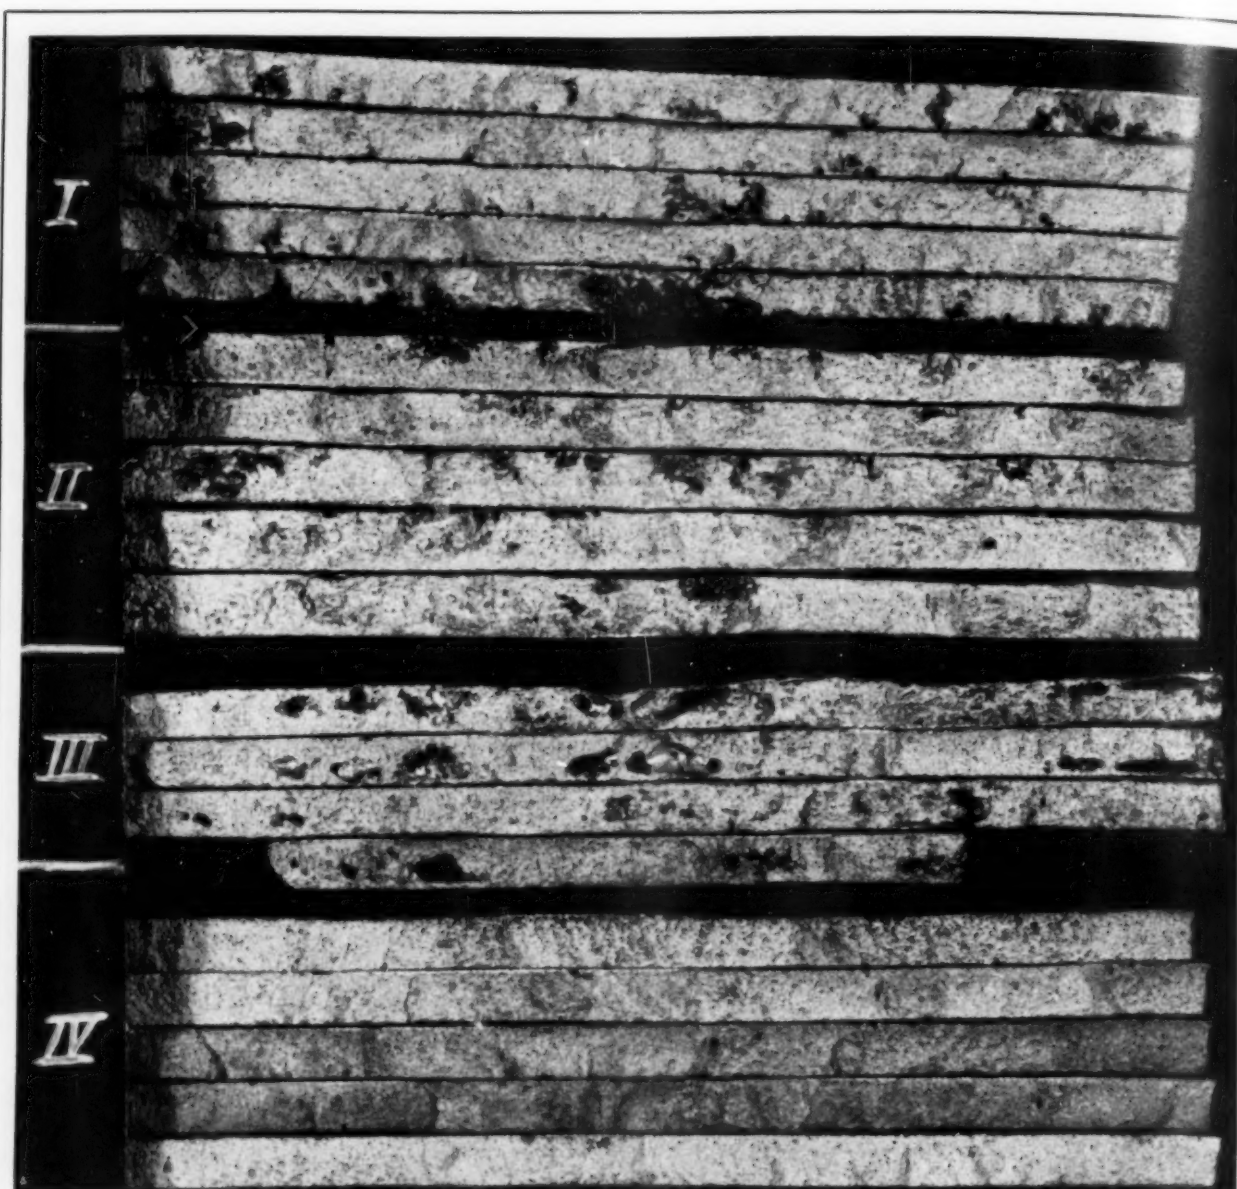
Fracture types observed in study of experimental castings.
